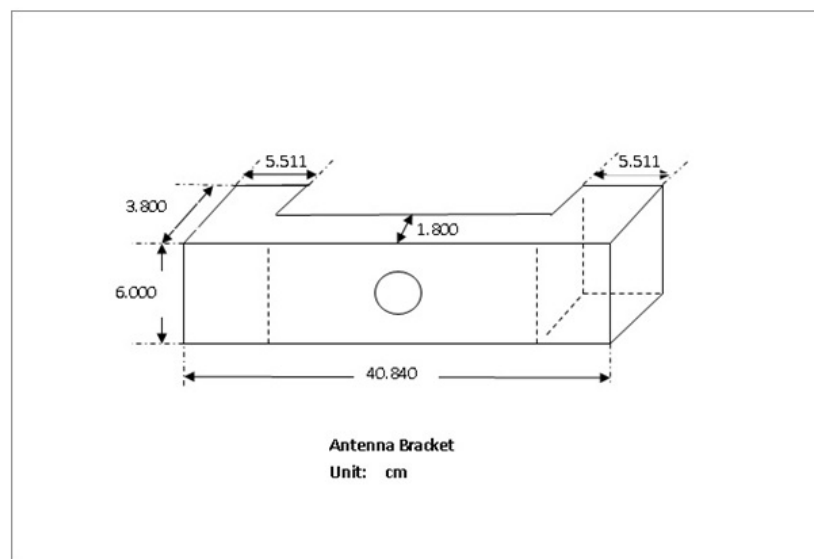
CAD outline drawing of the antenna adapter is shown.
